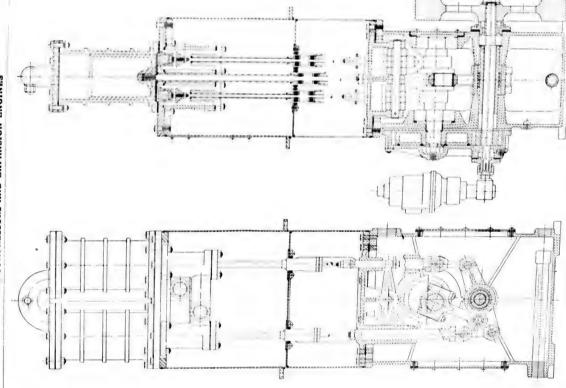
, Cross-section of Clark-Collins walking beam expander
